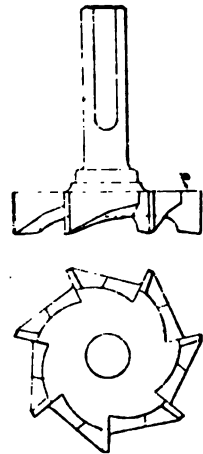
Coarsely Pitched Cutter for Gun-metal Fittings.
